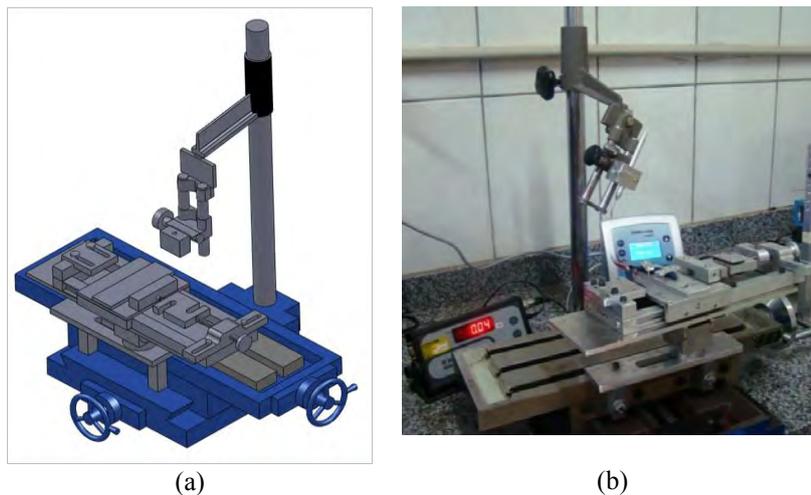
Draft of the experimental machine developed in environmental Solidworks®
